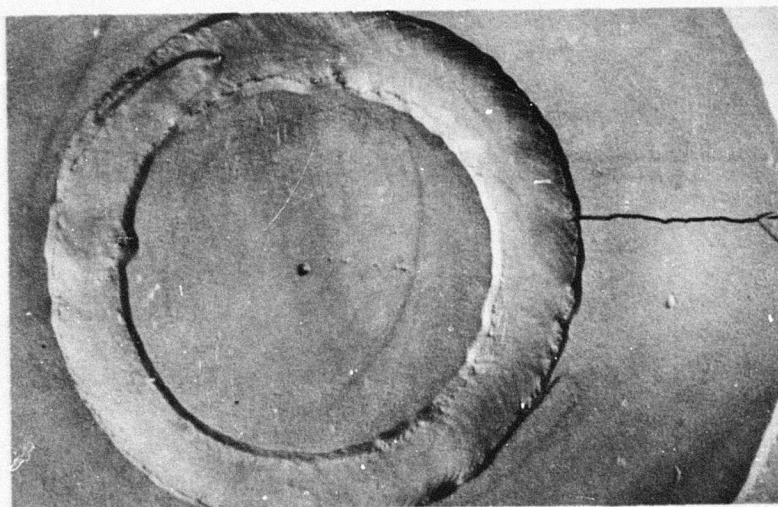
CROSS SECTION OF PATCH TEST ASSEMBLY USED FOR TESTING
